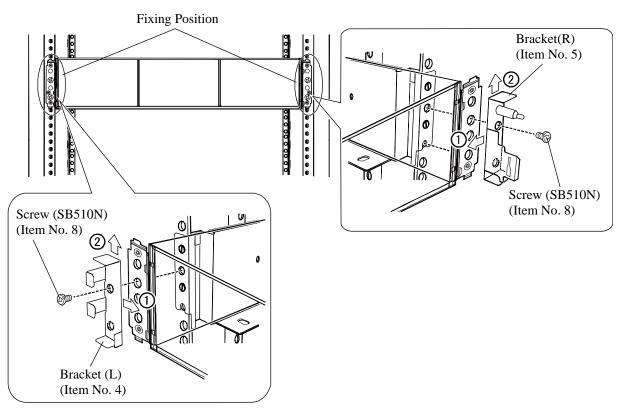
Fixation of Drive Box (Front)
